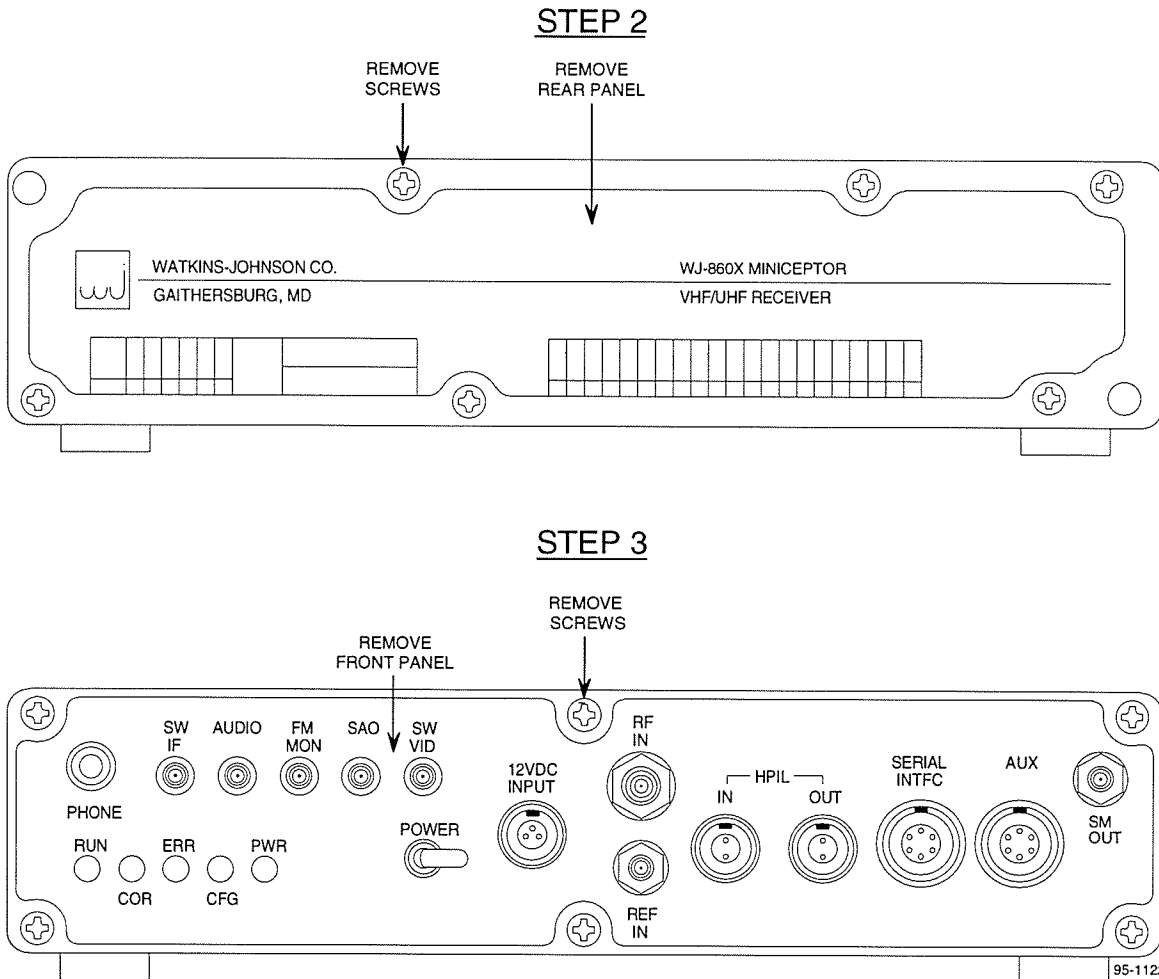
Removing the Minicaptor’s Front and Rear Panels
